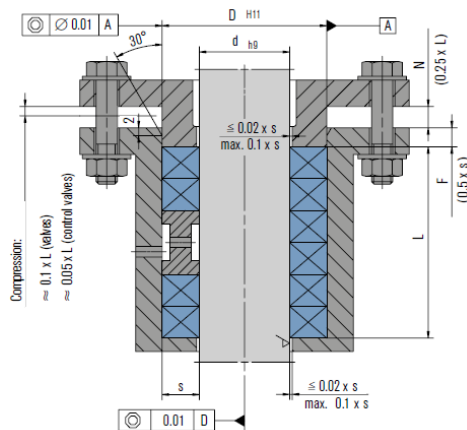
Tolerancing and geometric constraints related to the seal [12]
